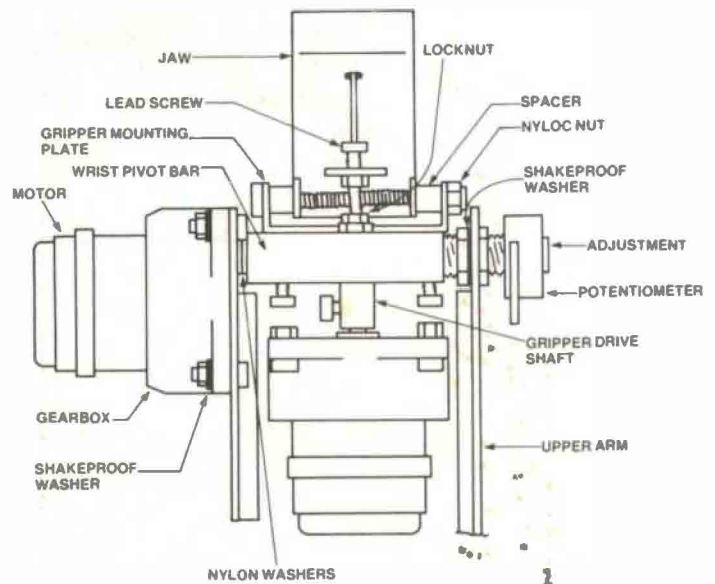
The wrist and gripper assembly, showing how the gripper fits to the wrist drive shaft.
